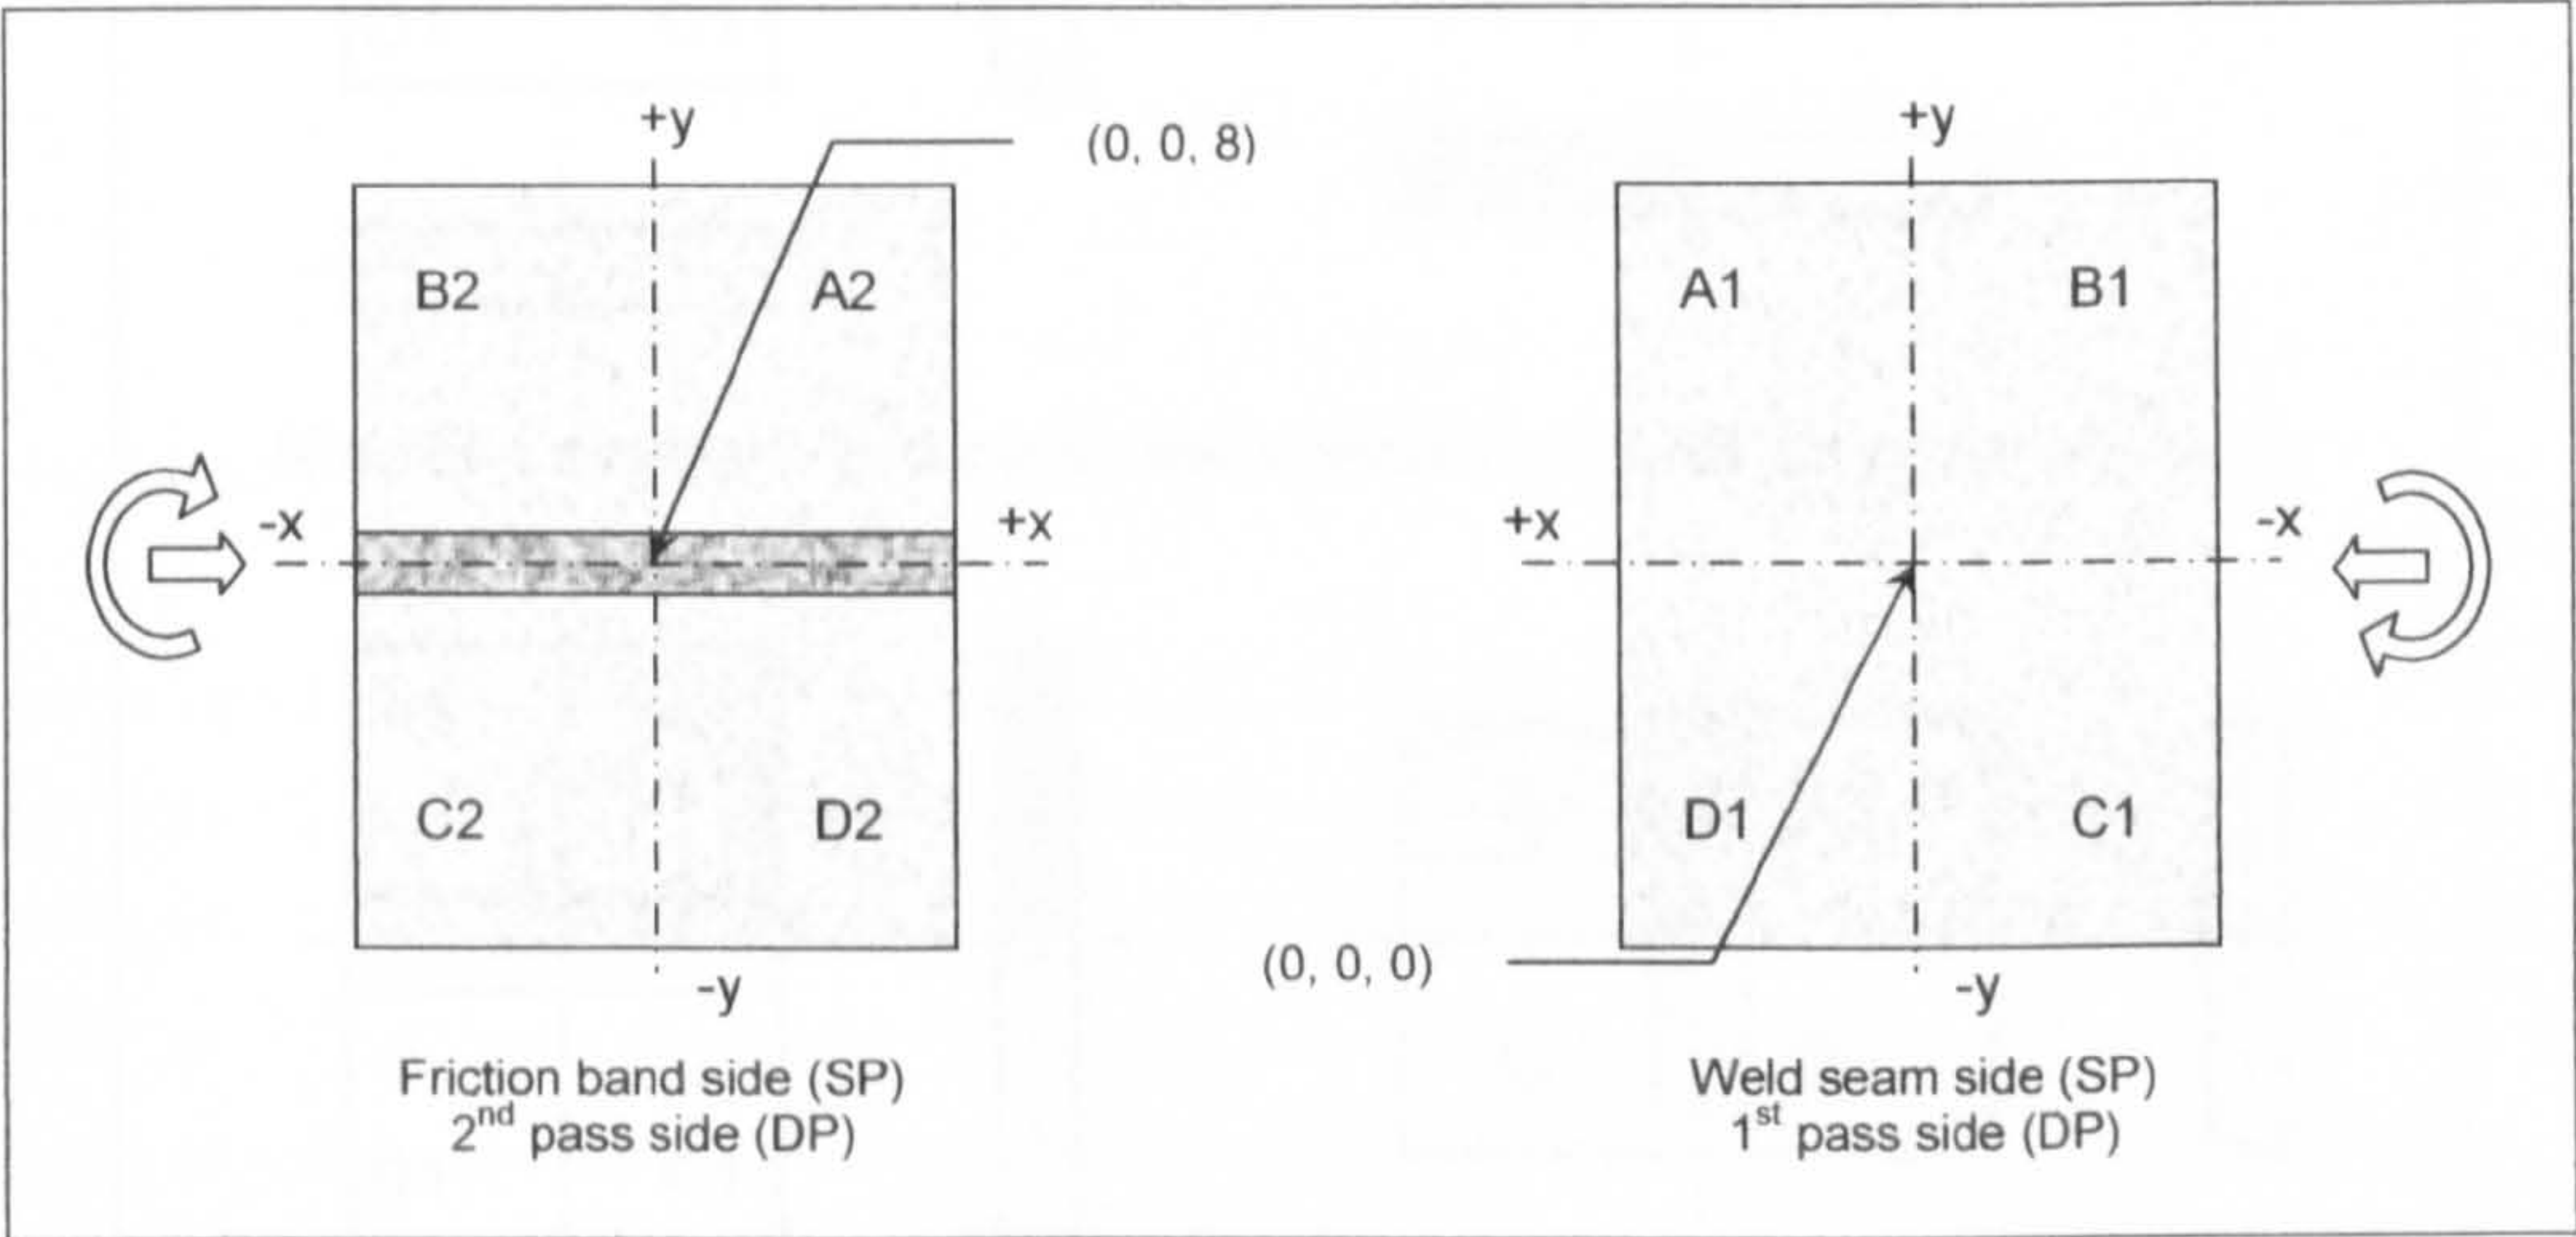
Coordinate system utilised for the FS welded plates synchrotron analysis (distance from the specimen centreline = $\pm x$, distance from the weld centreline = $\pm y$, distance from weld seam (SP)/1st pass (DP) side (through thickness) = z).
